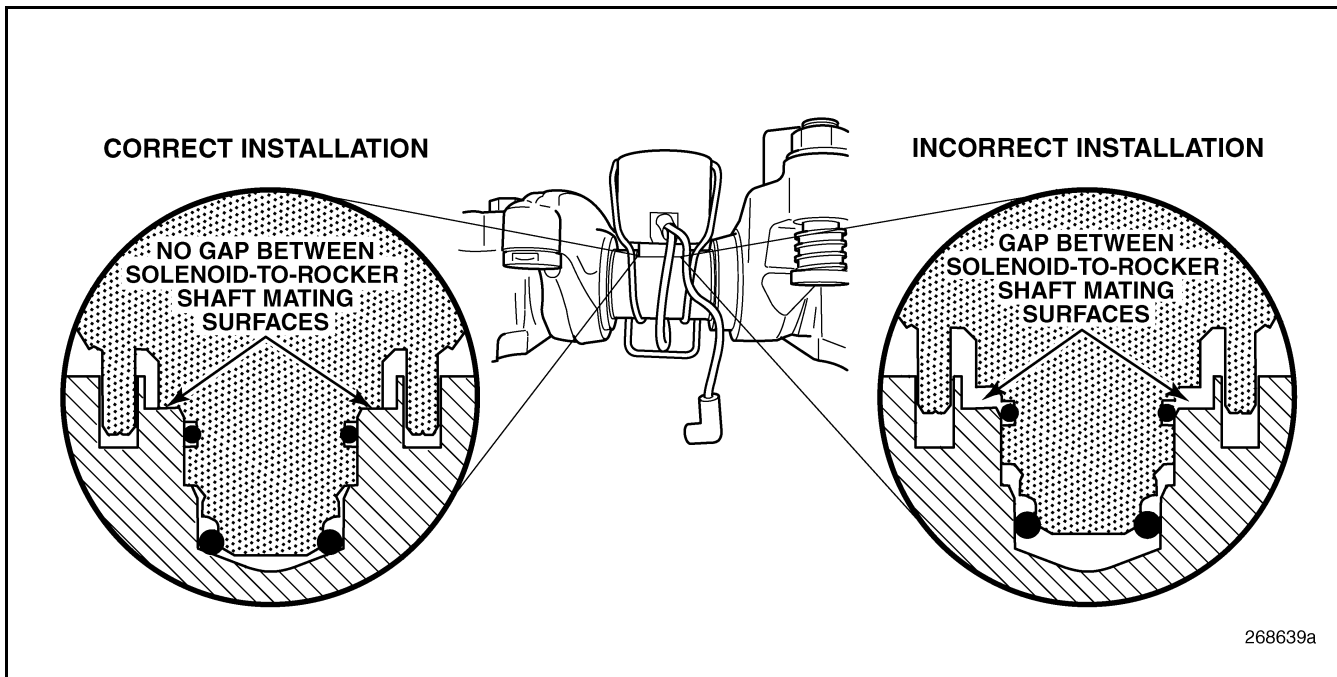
Inspect Solenoid-to-Rocker Shaft Mounting Surfaces
